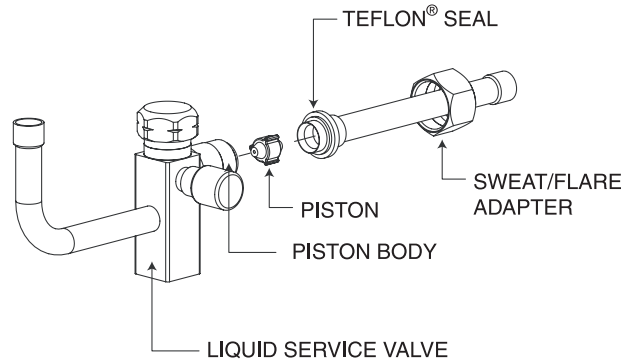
Liquid Service Valve with Sweat Adapter Tube
